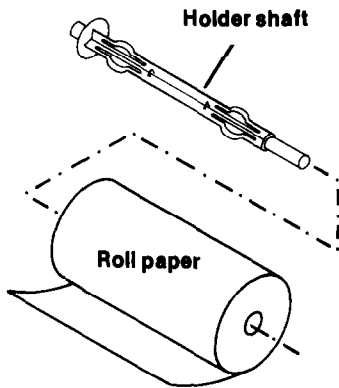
The holder shaft is inserted in the roll of paper, which is then mounted on the roll-paper holder, as shown in Figure G-9.
